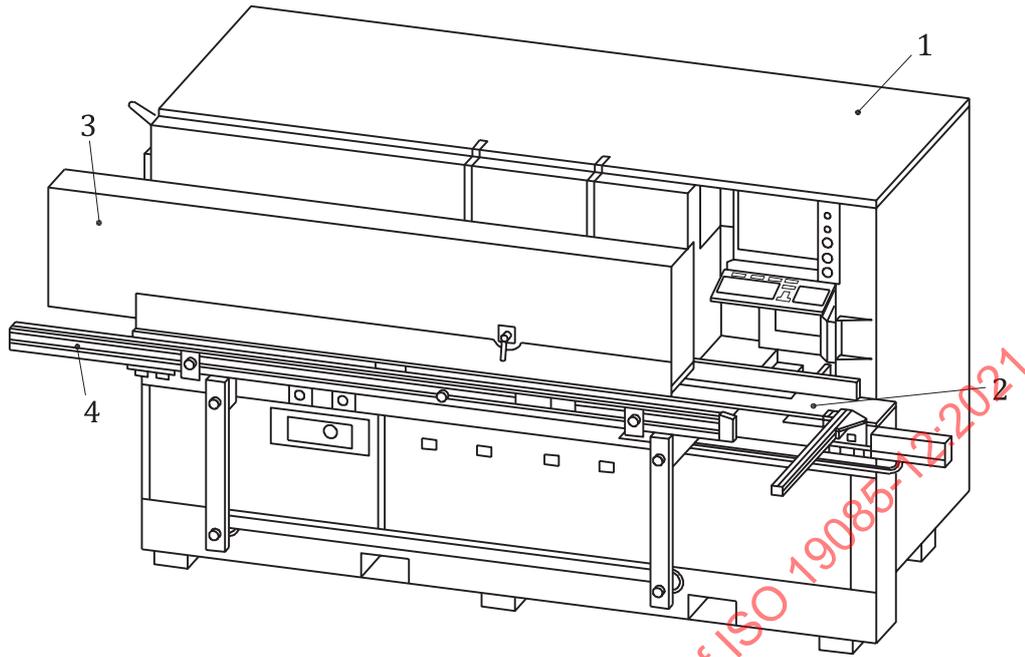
Example of a single end tenoning machine with manual feed sliding table
